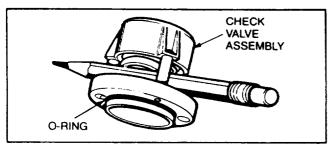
CLEANING 3/4" AND 1" CHECK VALVE
